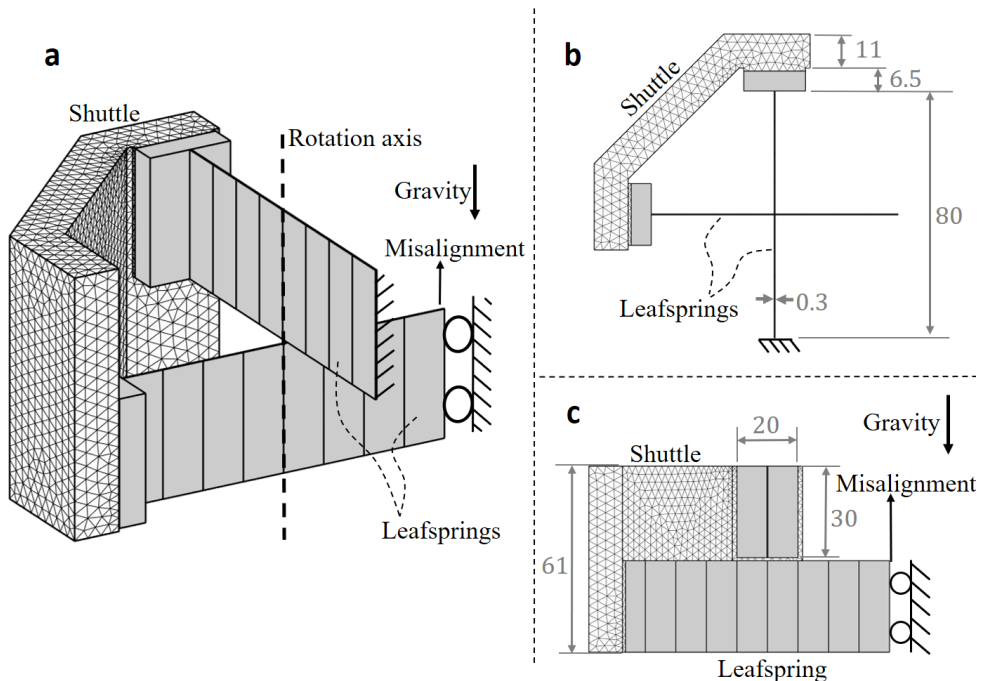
Misaligned cross flexure, a) three-dimensional view, b) top view, c) side view. Dimensions are given in millimeters.
